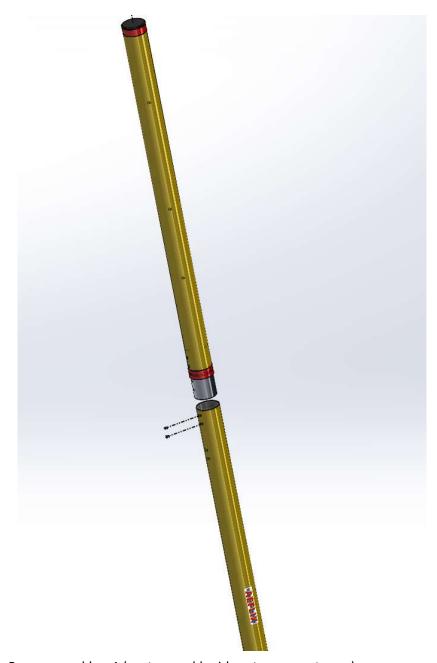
Beam assembly – 1 (post assembly side cut – see next page)
